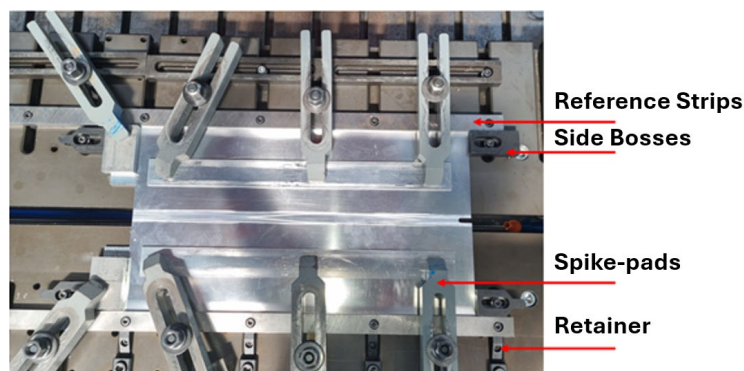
Experimental clamping setup used during BT-FSW, ensuring stable positioning and force-controlled welding conditions.
